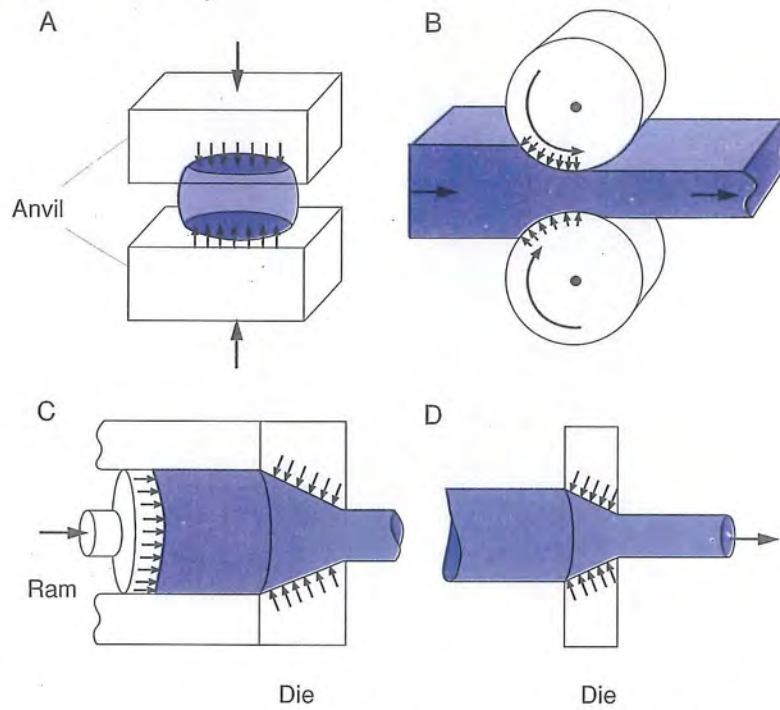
Typical mechanical forming methods. (A) Open die forging. (B) Rolling. (C) Extrusion. (D) Drawing. Arrows show forces on workpiece.
